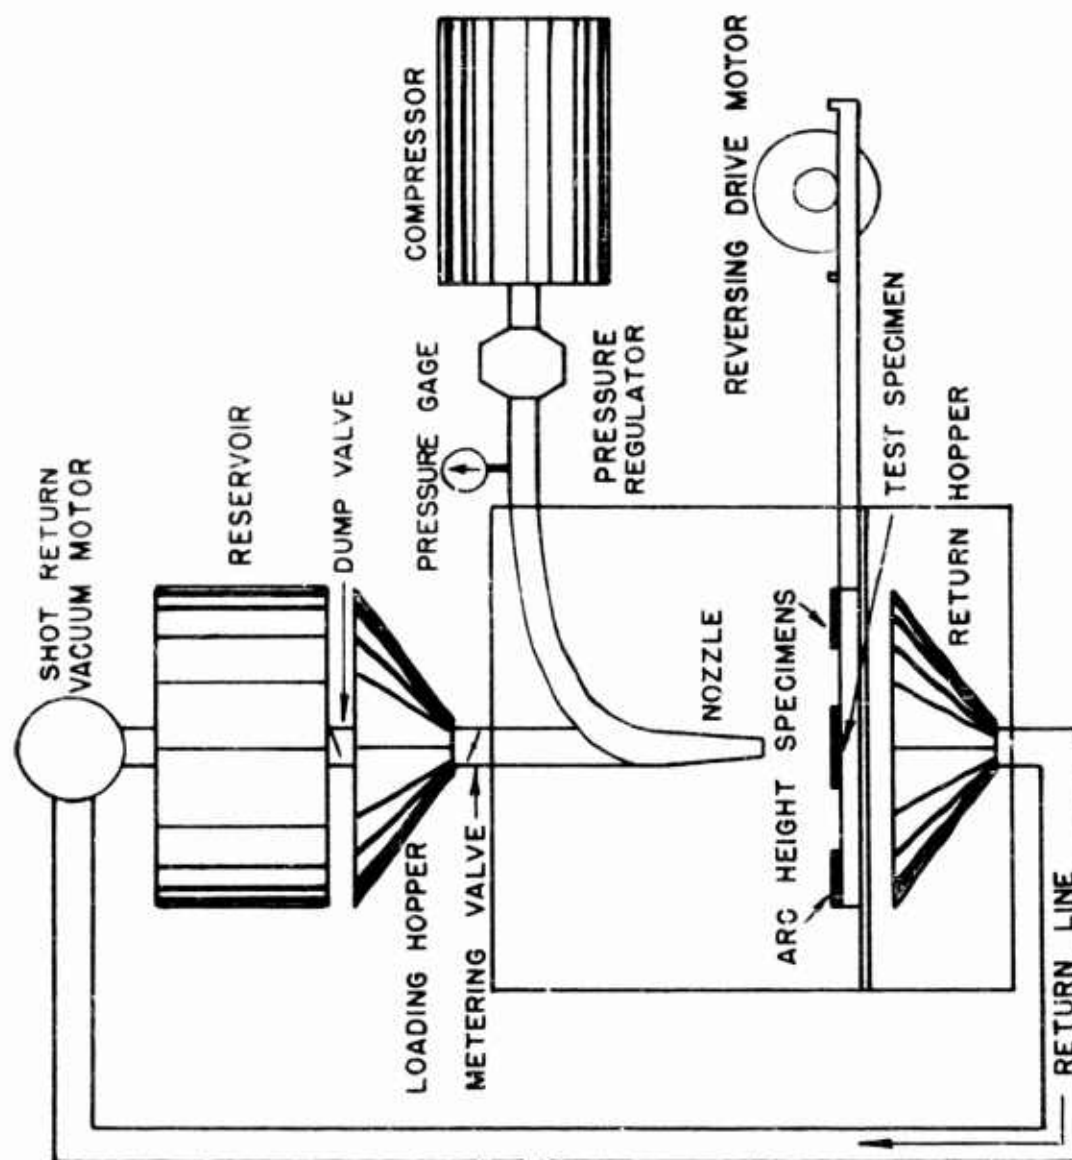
SHOT PEENING MACHINE LAYOUT
